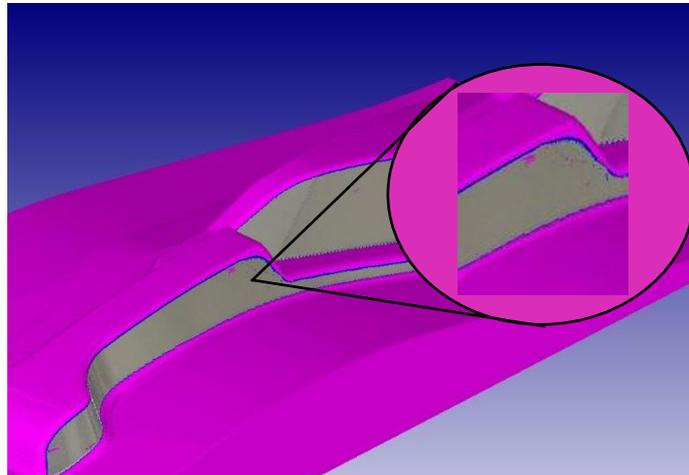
Finishing simulation with a spherical cutter on a 3+2-axes CNC machine.
